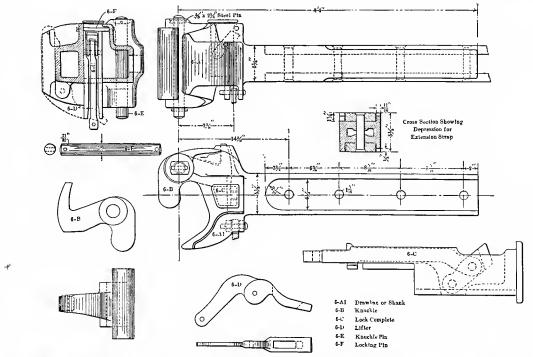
National Passenger Coupler No. 6A1 and Parts. National Car Coupler Company.
